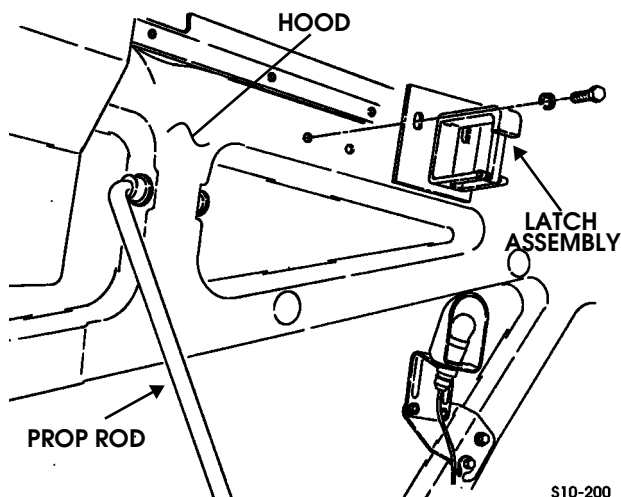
Hood Release Latch and Bracket Assembly Mounting
